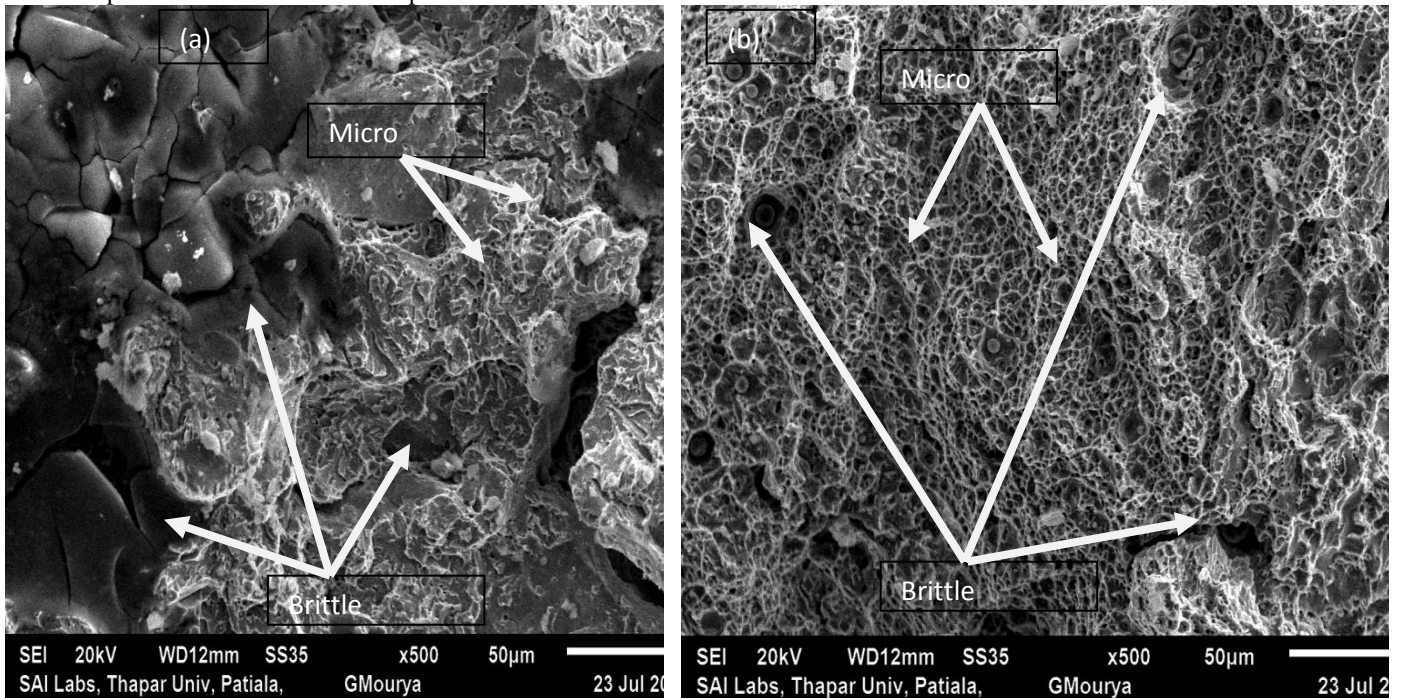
SEM of weldment fracture surfaces (a) with Vanadium 0.4% and (b) with nickel 20%, of Charpy impact broken specimens tested at deep cryogenic temperature (-60⁰C).
